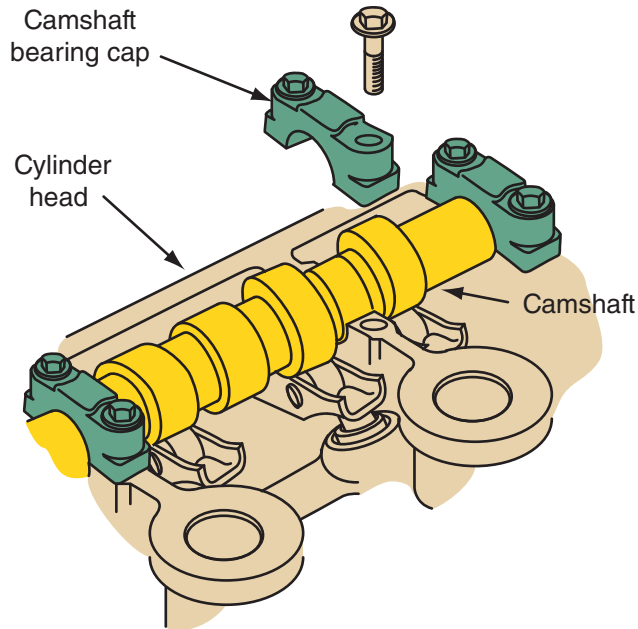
Many OHC cylinder heads are machined to accept one or two camshafts above the valves and have bearing caps to secure the camshaft.
